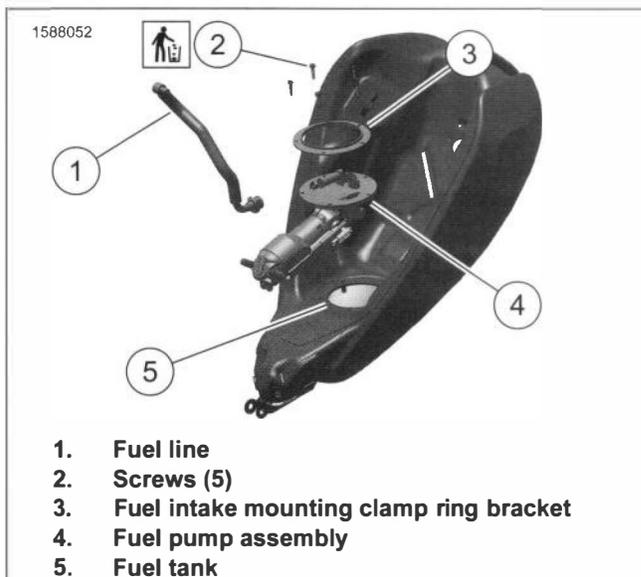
Fuel Pump Assembly (Fuel Pump Bracket)
